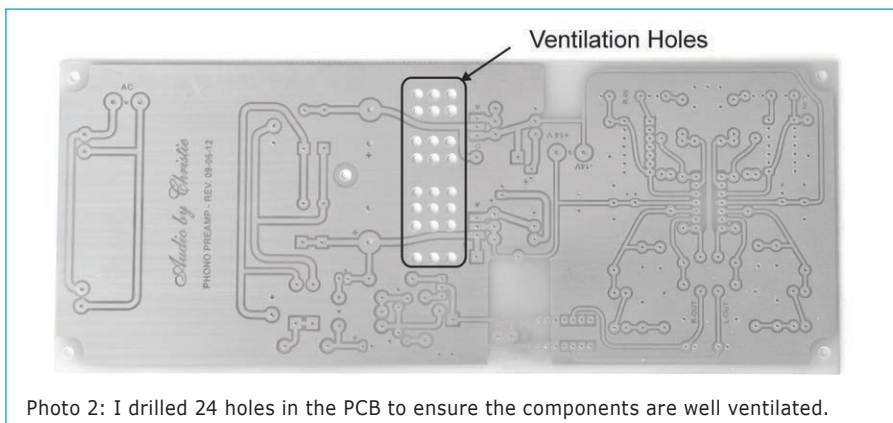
I drilled 24 holes in the PCB to ensure the components are well ventilated.
